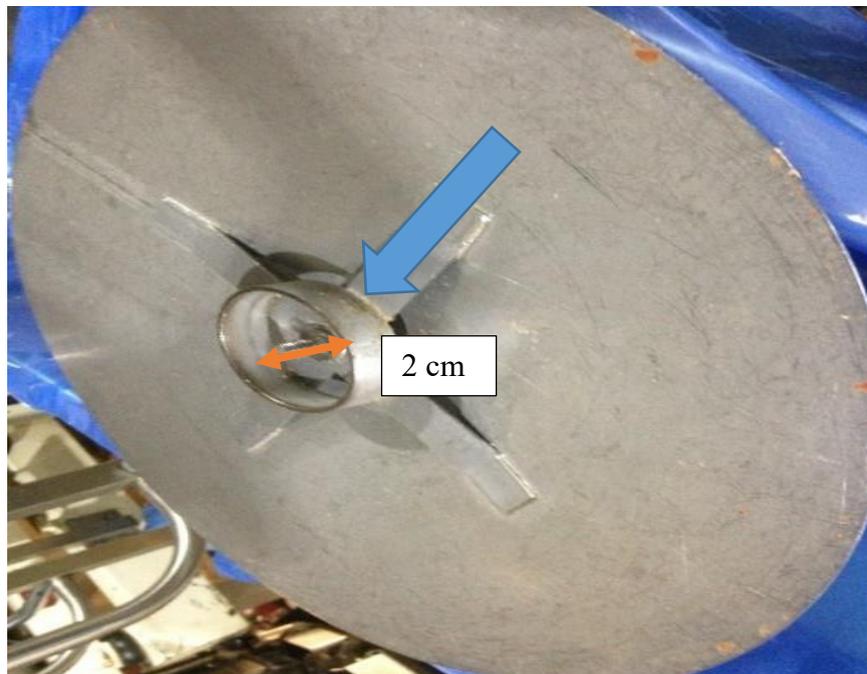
Lower side of the crisps machine part which placed on top of the production machine
